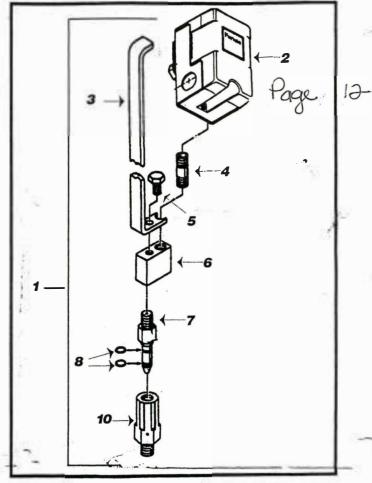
EXPLODED VIEW OF DAWSP CONTROL KIT
